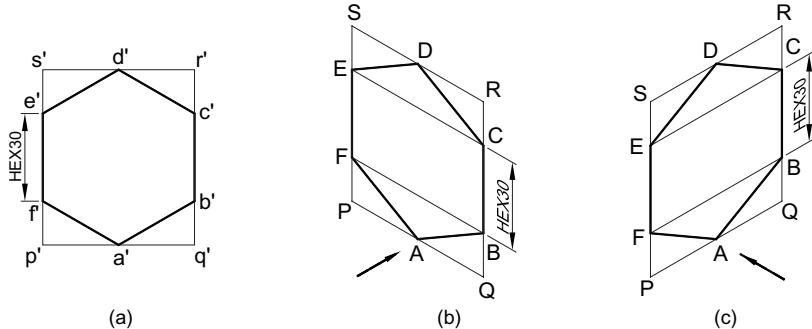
Hexagon (a) Orthographic view (b) and (c) Isometric views
